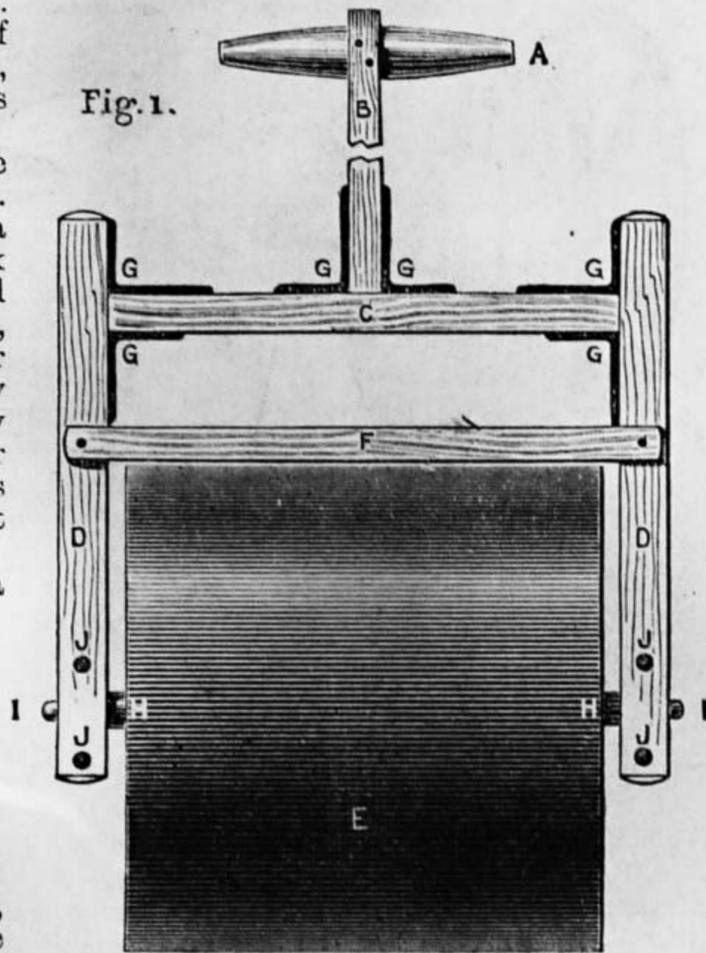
Garden Roller in Plan. Fig. 2.—Platform on which to build Roller. Refs. to Letters—A, Handle; B, Handle Bar; C, Cross Bar; D, Side Pieces; E, Roller; F, Scraper; G, Angle Pieces; H, Gun Barrel; I, Ends of Axle Bar; J, Bolts and Washers; K, Hole for Barrel; L, Oak Stops; M (Fig. 4), Hole in Frame to take Axle.
